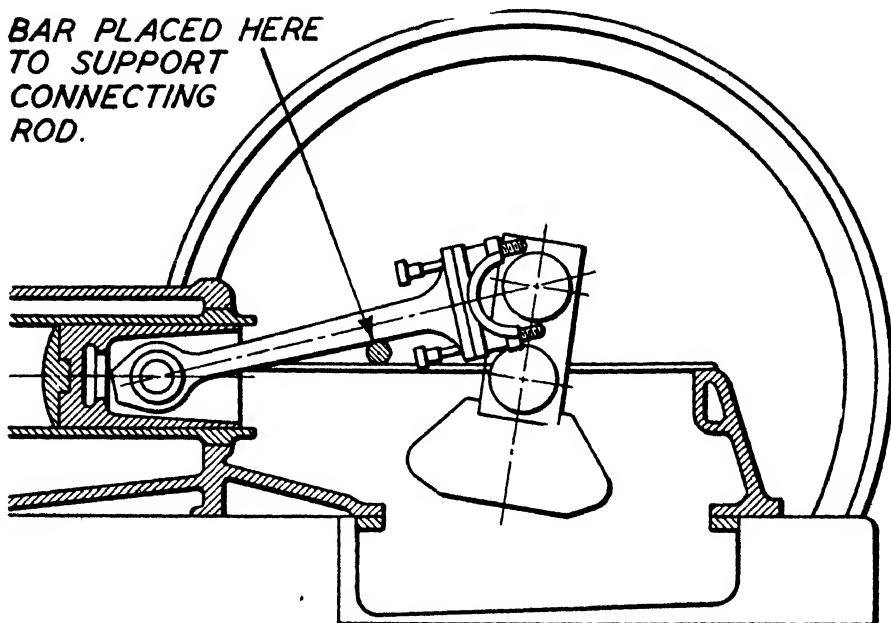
BACK HALF OF LARGE-END BEARING IN POSITION WITH BOLT ENDS JUST SHOWING THROUGH
